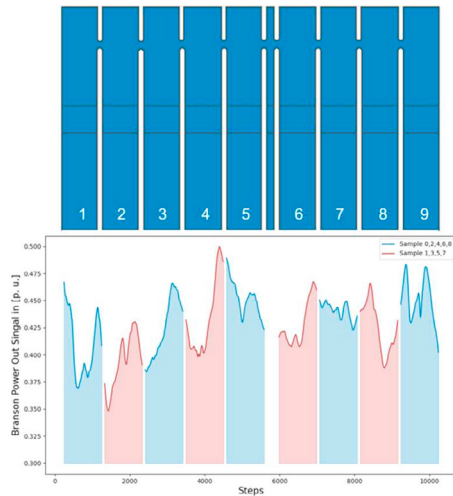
Upper part: Scheme of a welded plate with its division in lab shear strength test samples and one sample for documentary purpose (between 5 and 6). Lower part: Welding power (=Branson Power Out) signal which is divided in sub-samples which contain the values measured during the welding of each cut sample.
